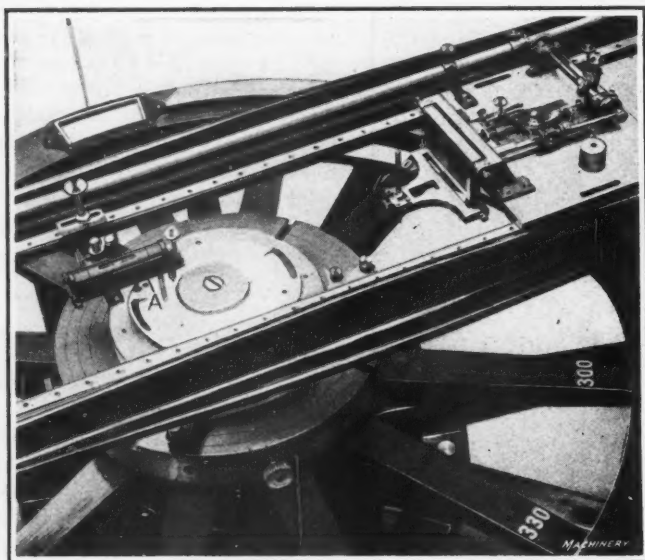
Method of adjusting Work on Machine shown in Fig. 4
